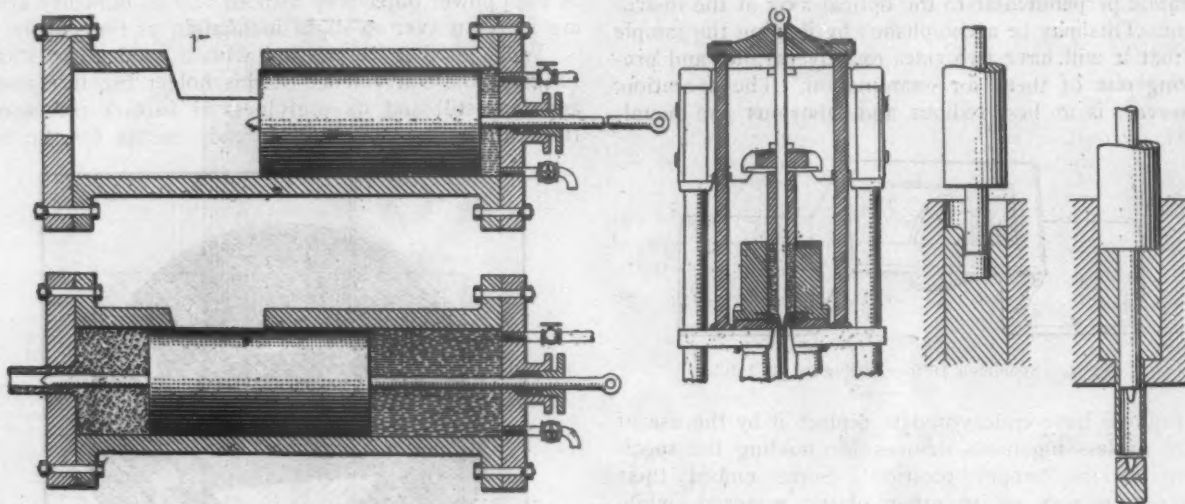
Details Showing Three Types of Dies for Making Pipe or Hollow Bodies.
